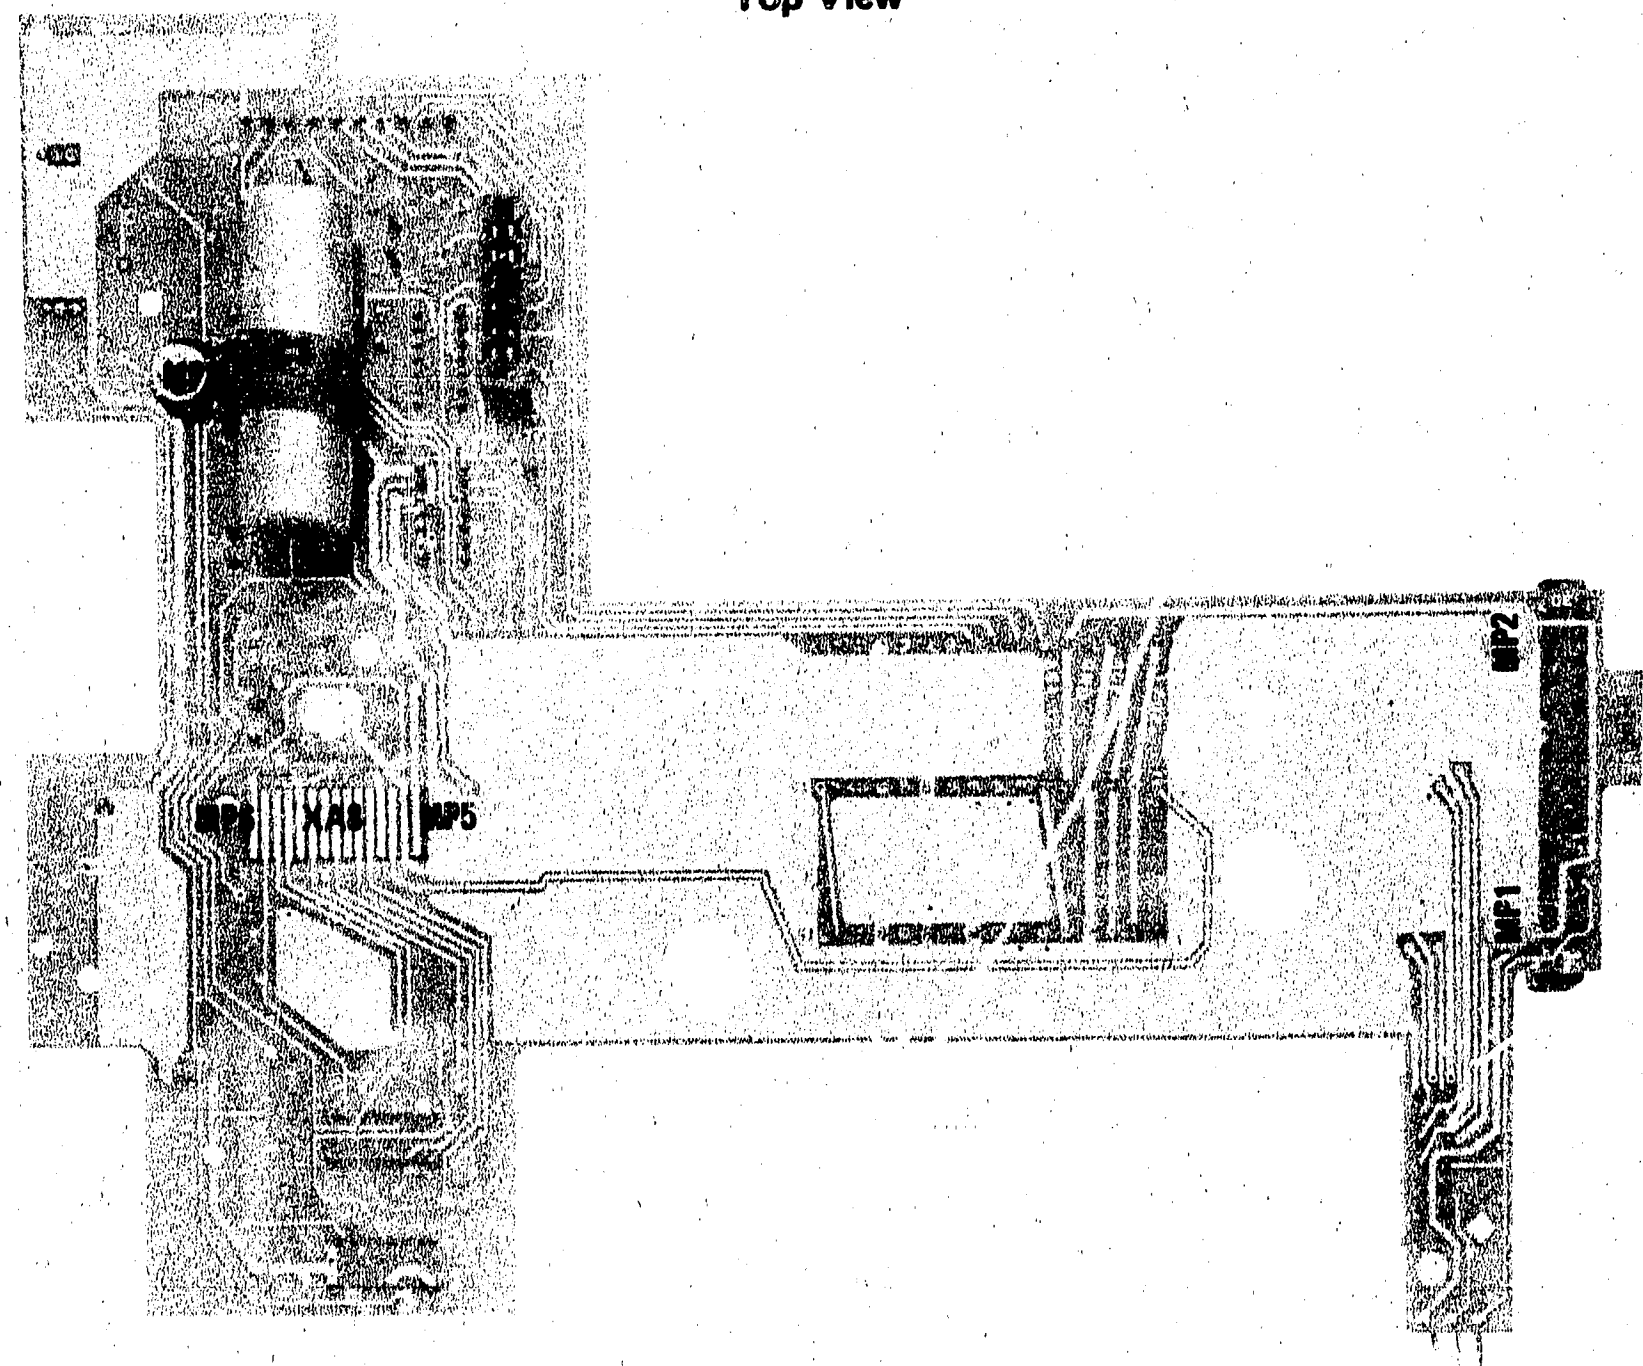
A13 Modulation/Metering Mother Board Assembly Component Locations (Top View)
